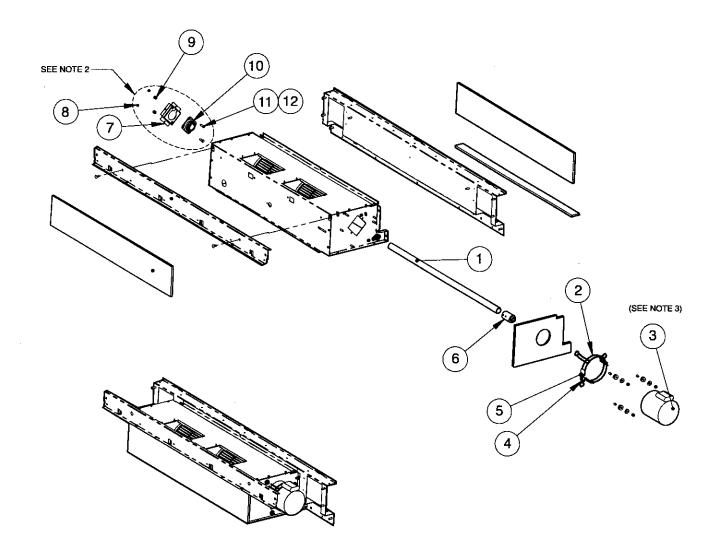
40UH200 Ventilator Blower Drive Train Assembly
